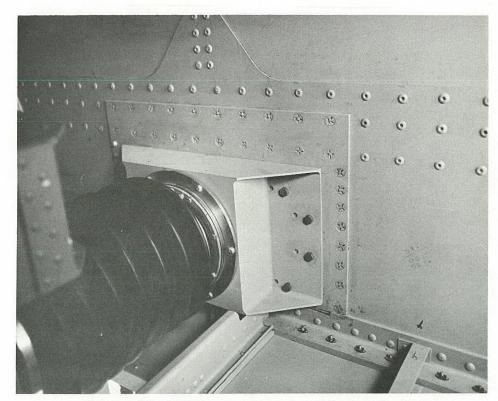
LIM Support Tunnel and Anchor Brackets
